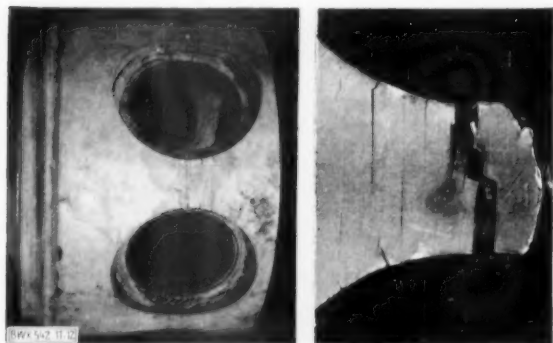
Cracks due to thermal shock at the nozzle head of an injection desuperheater. Left: View of nozzle head (nozzle removed) with cracks in ligaments between nozzle openings. Right: Close up view of torn ligament.
